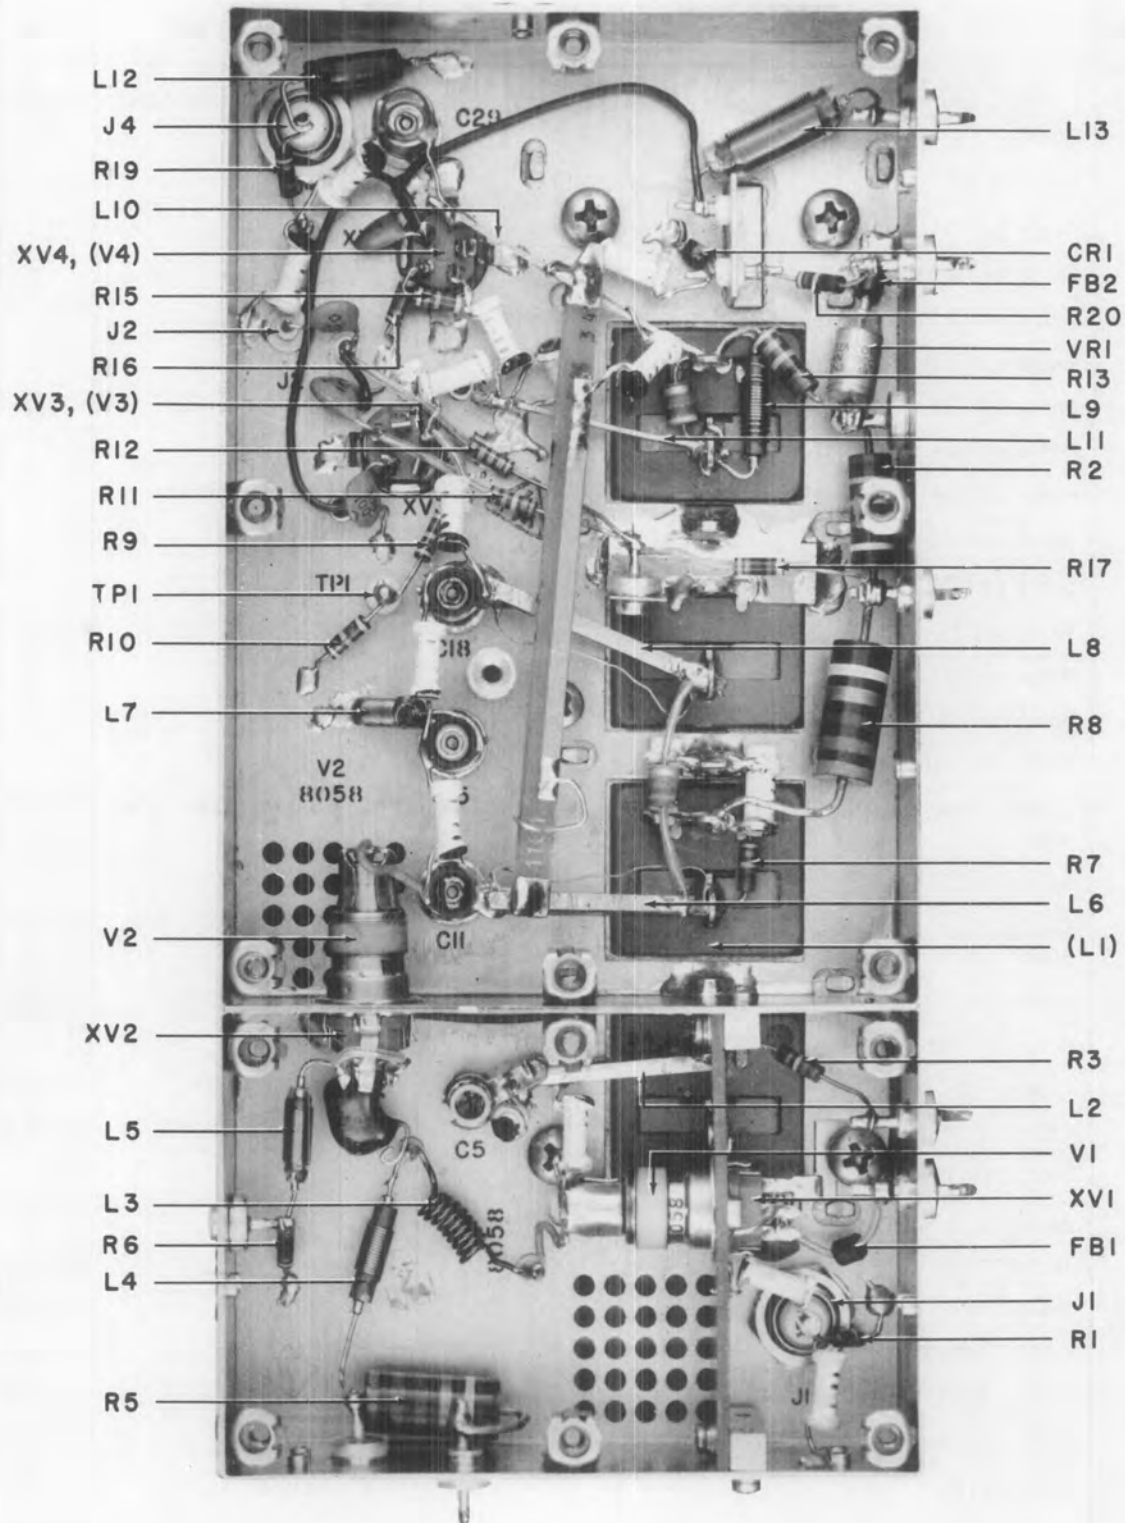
Type 71383 60-300 MC Tuner (A2), Location of Components
